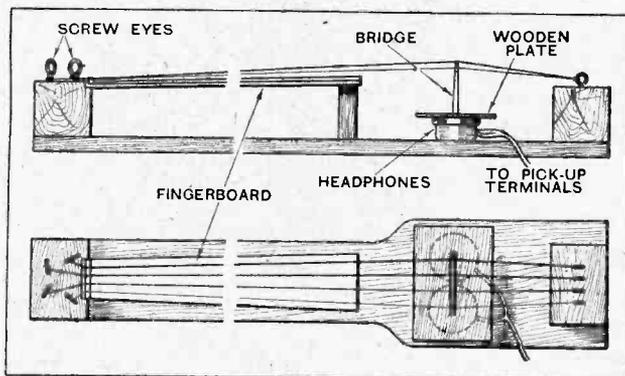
An illustration of the method of mounting the parts of the electrical 'cello on a wooden baseboard, and with two telephone ear-pieces mounted side by side.
